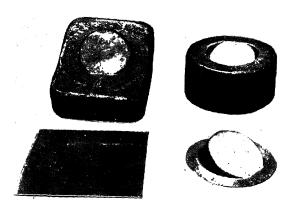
Dies for a coining press, raw stock, and finished part. (Chambershurg Engineering Co.)
